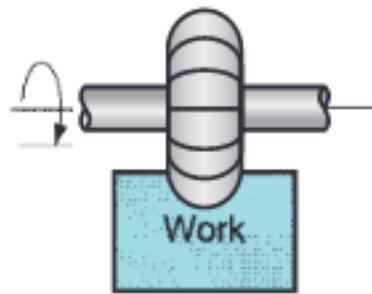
shows a milling tool and workpiece (Groover, 2014)
